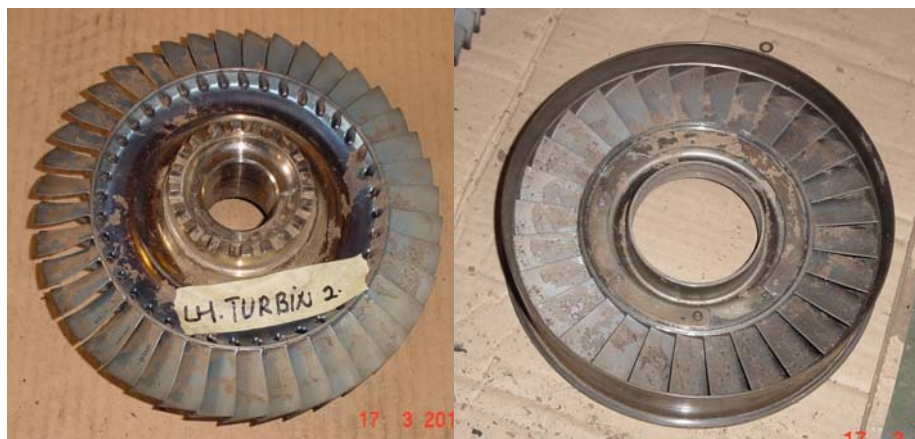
Turbine No. 2 and Nozzle Guide Vane of Engine S/N. P-22327
